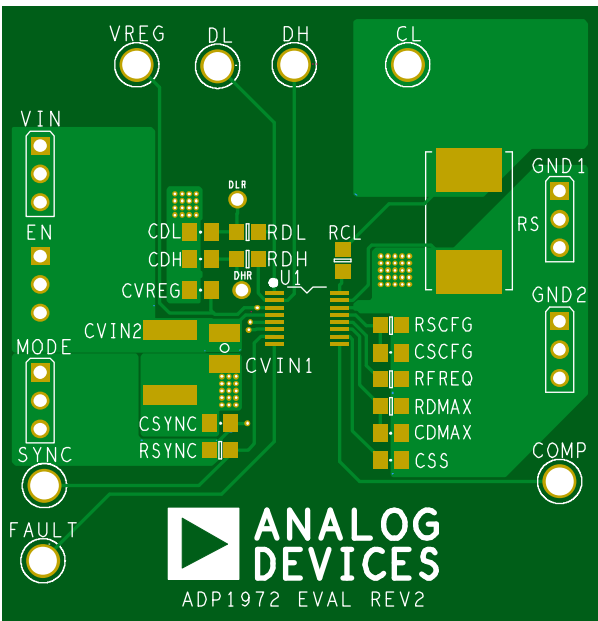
ADP1972 Evaluation Board PCB Top Layer
